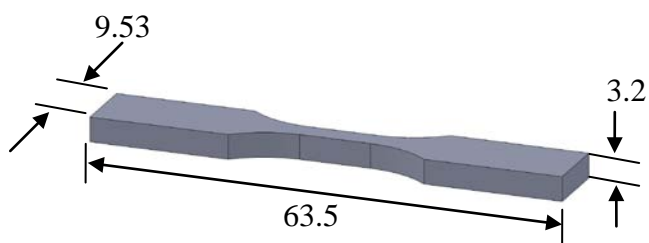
ASTM D638 Type V specimen (all units in millimeters)
